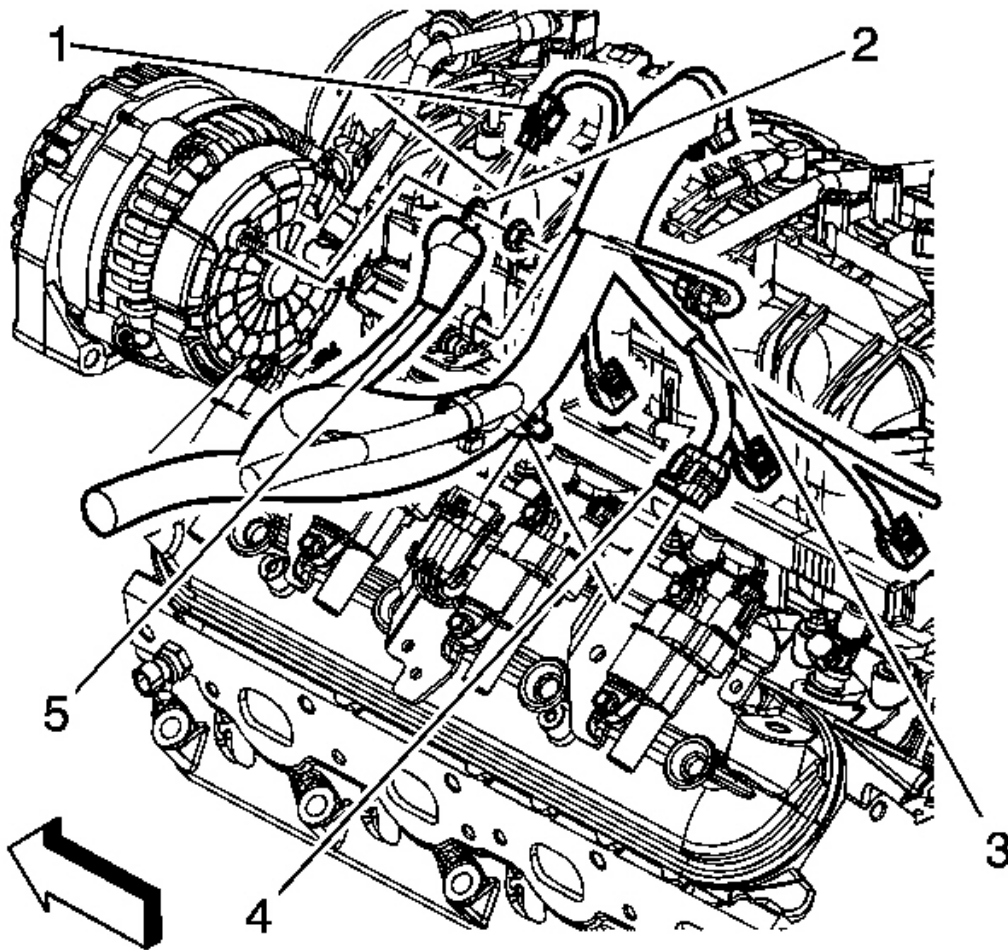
Engine Wiring Harness Electrical Connector & Generator
